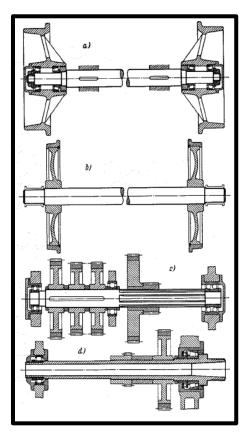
a) Fix solid shaft; b)Rotatory solid shaft; c)Solid shaft; d)Gap shaft.<sup>5</sup>
